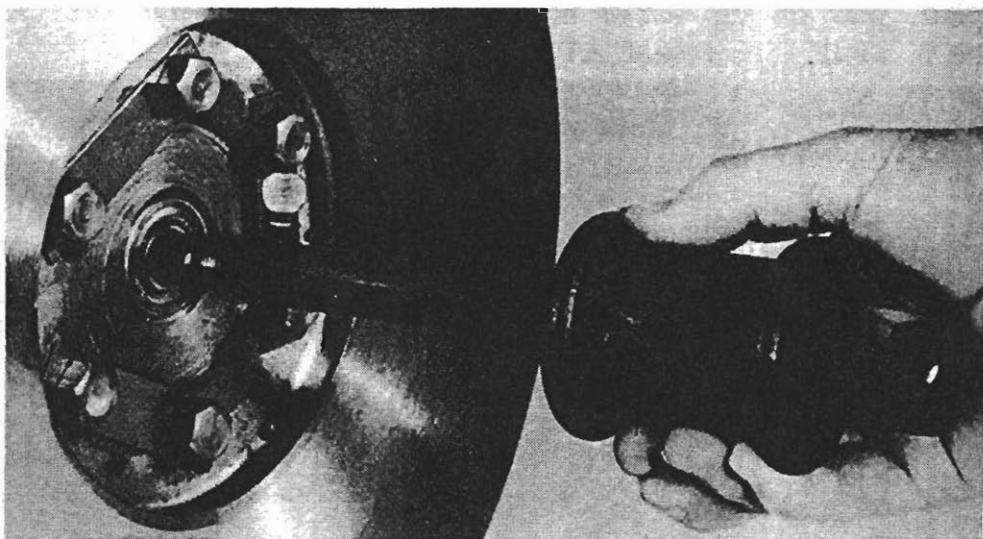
Be Sure the Flywheel and Clutch Cover are Marked Before Disassembly.
